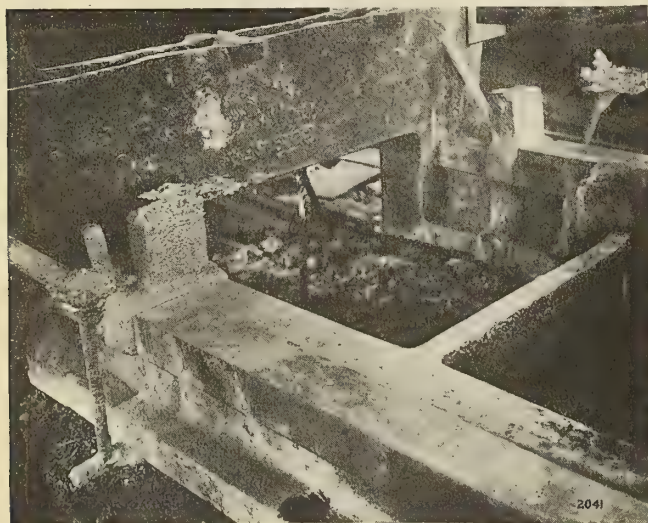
Iron Casting Welded by Thermit Process
